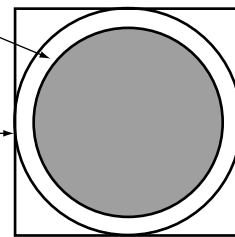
Footprint - 5 mils stencil - solder mask defined
